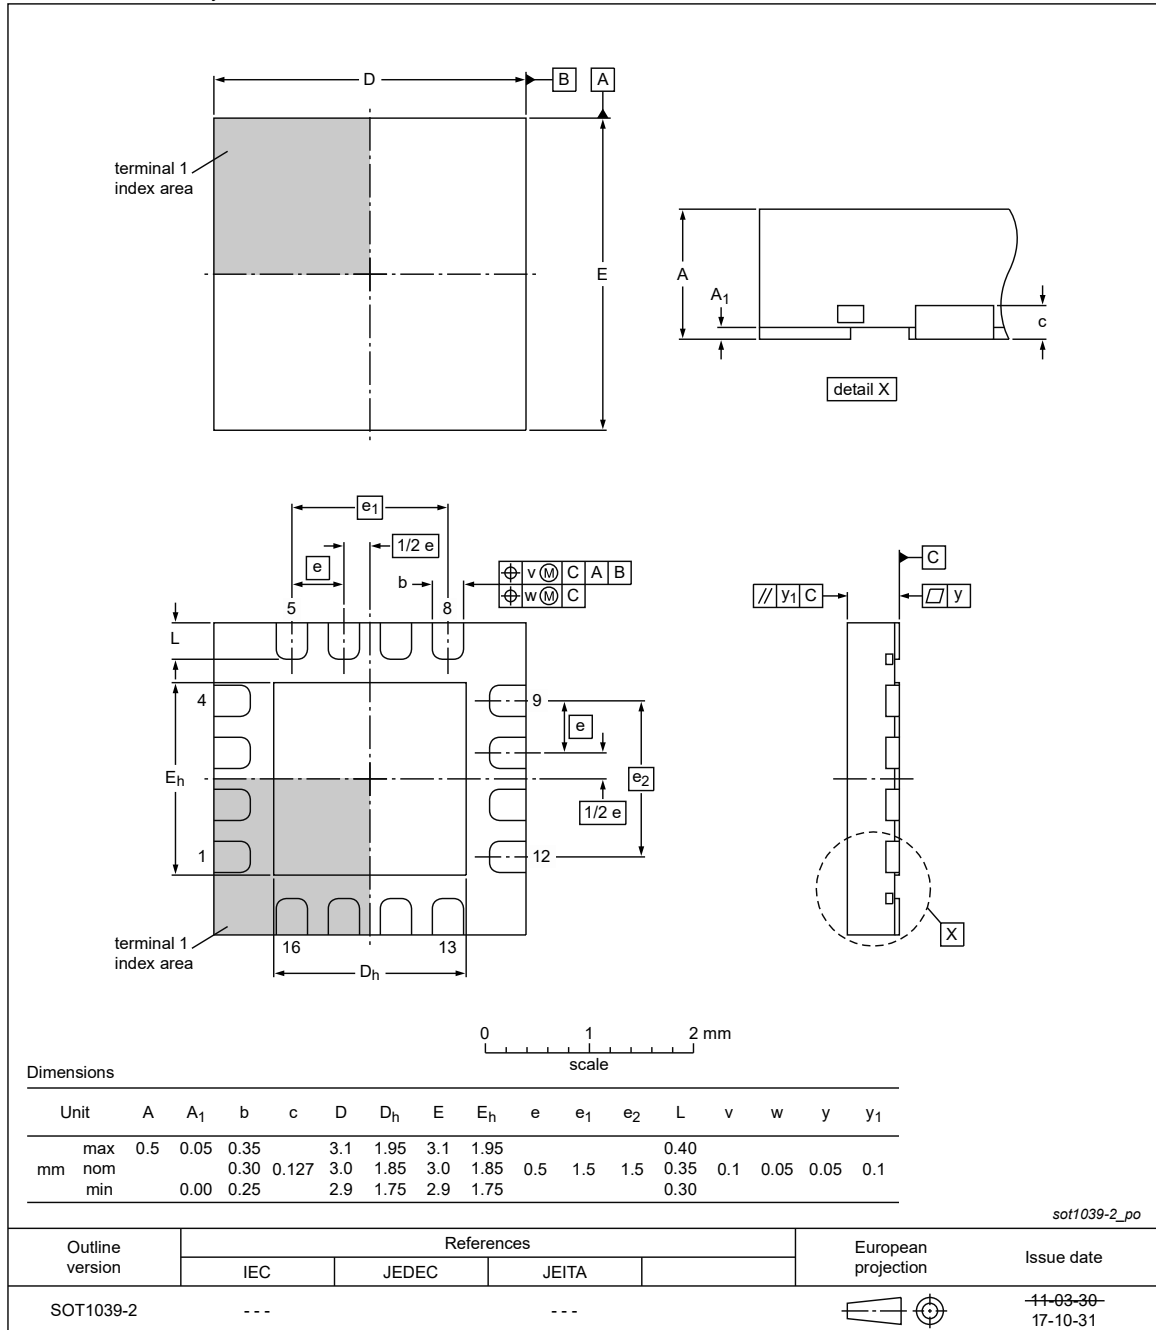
Package outline HXQFN16(U) (SOT1039-2)
